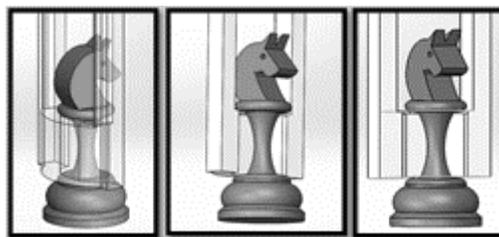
Clamps that hold the chess piece from the top of the body the base of the body.
